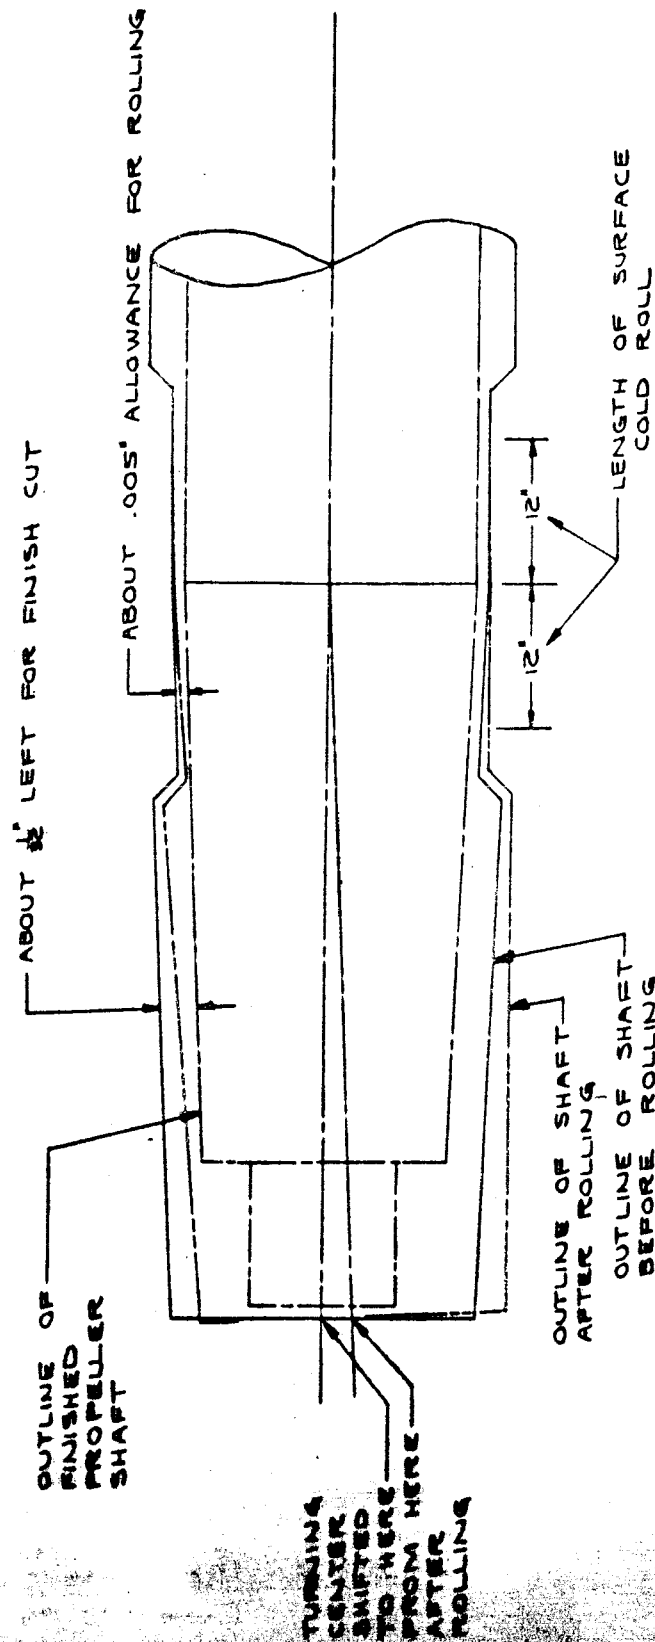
SKETCH SHOWING METHOD OF CORRECTING ECCENTRICITY ENCOUNTERED DUE TO SURFACE COLD ROLLING THE PROPELLER SHAFT OF AN ESSO TANKER.
